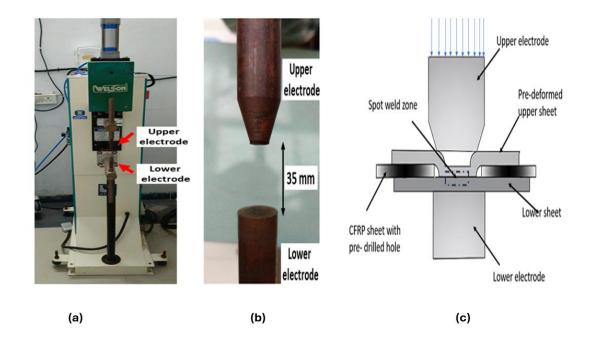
(a) Resistance spot welding machine (b) Spot welding electrodes (c) Schematic of joining Sandwich CFRP with MS using Resistance spot welding
